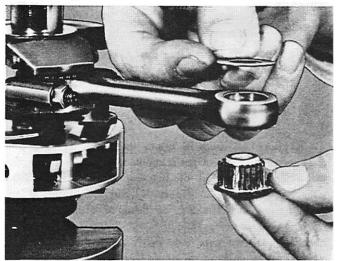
Inserting Piston Pin Bearings & Sleeve into Connecting Rod
